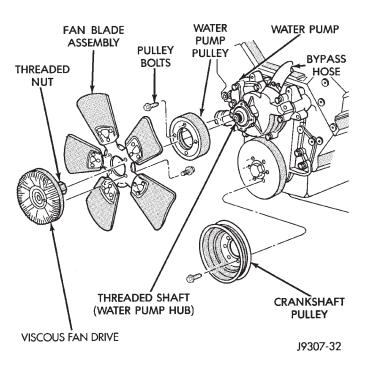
Fan Blade/Viscous Fan Drive—5.2L V-8 Engine
